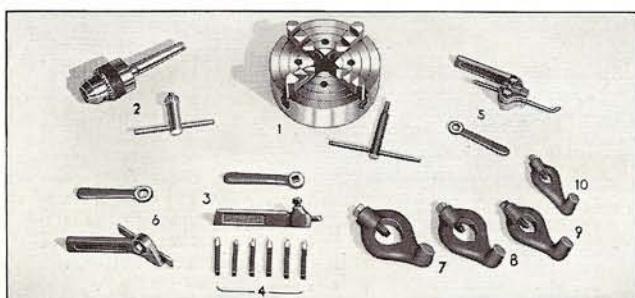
No. 105-WT Chuck and Tool Assortment for 9-inch "Workshop" South Bend Lathes.
